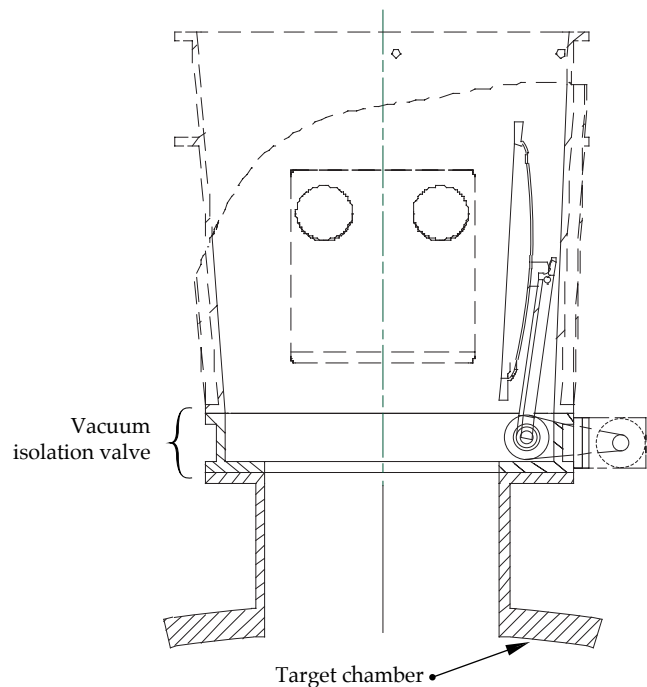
The vacuum isolation valve interfaces directly with the target chamber. (40-00-1097-2271pb01)
